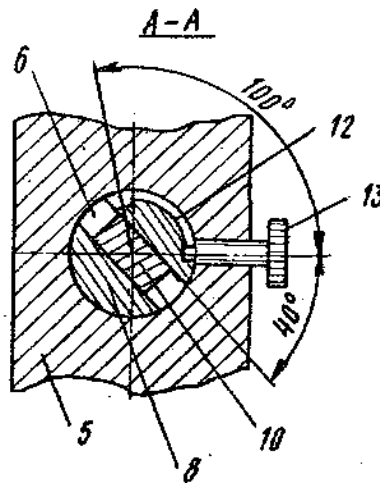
v – the Device is an electrode holder for welding sloped electrode
